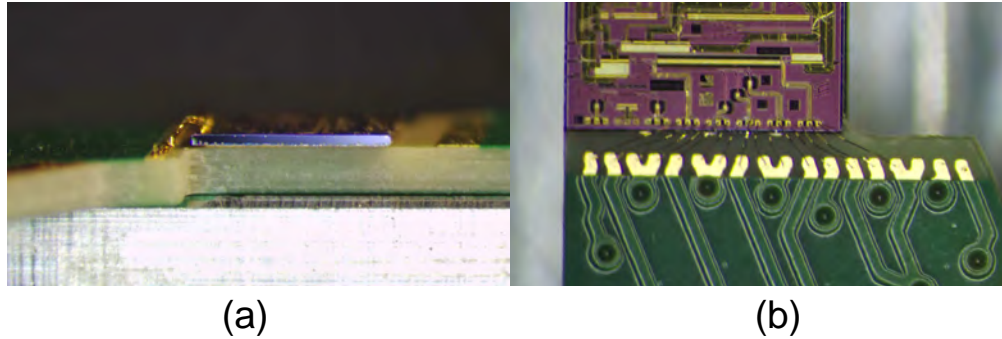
(a) Lateral photograph showing the wire bonds connecting the PIC to the PCB, and (b) top view highlighting the wire bonds contacting the on-chip pads and the RF pads of the custom-designed PCB.
